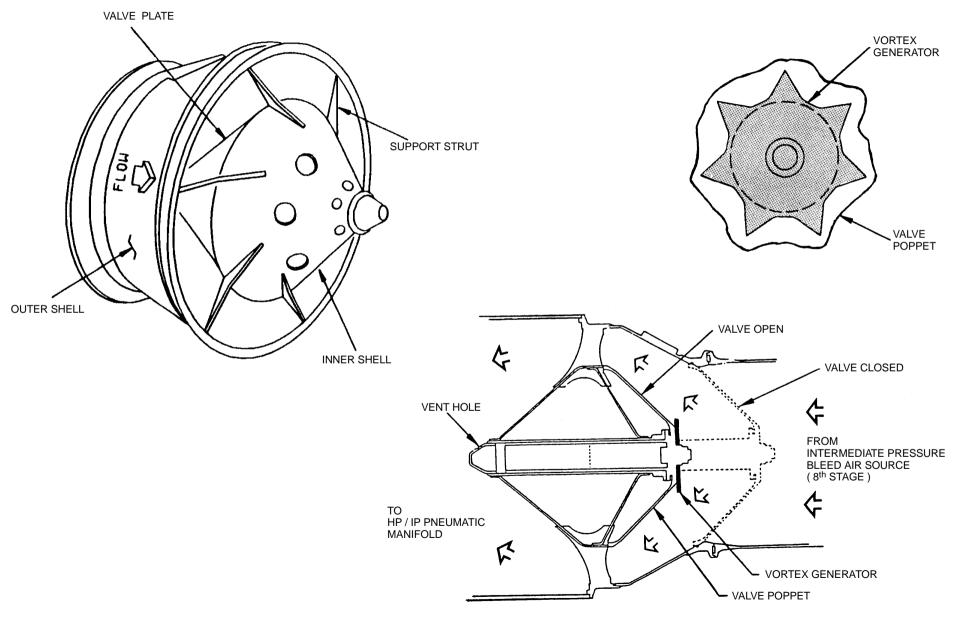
INTERMEDIATE PRESSURE CHECK VALVE
